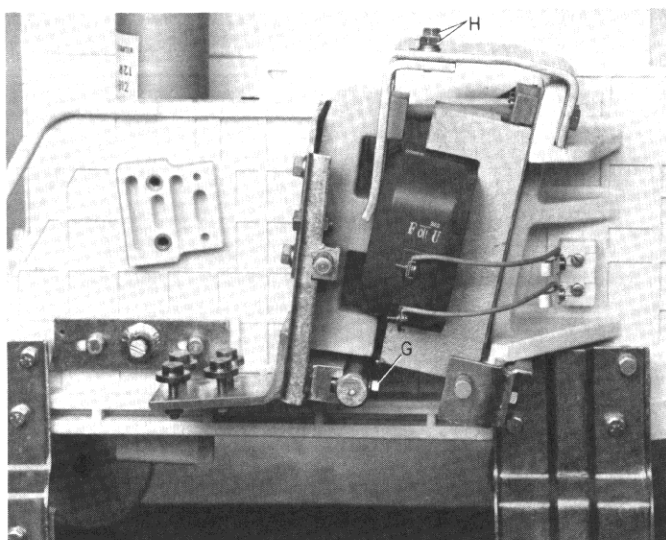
Coil replacement Step 4 and Step 5 — removal of armature assembly and coil retainer bolts
